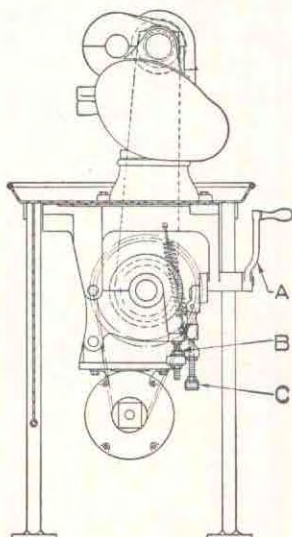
Underneath Motor Drive Arrangement for 10"-14" Collet Bench Lathes
